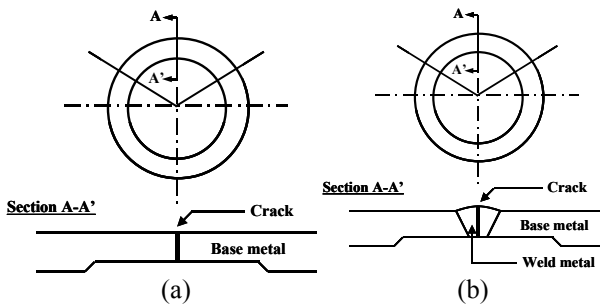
Crack locations for (a) base metal test and (b) weld metal test
